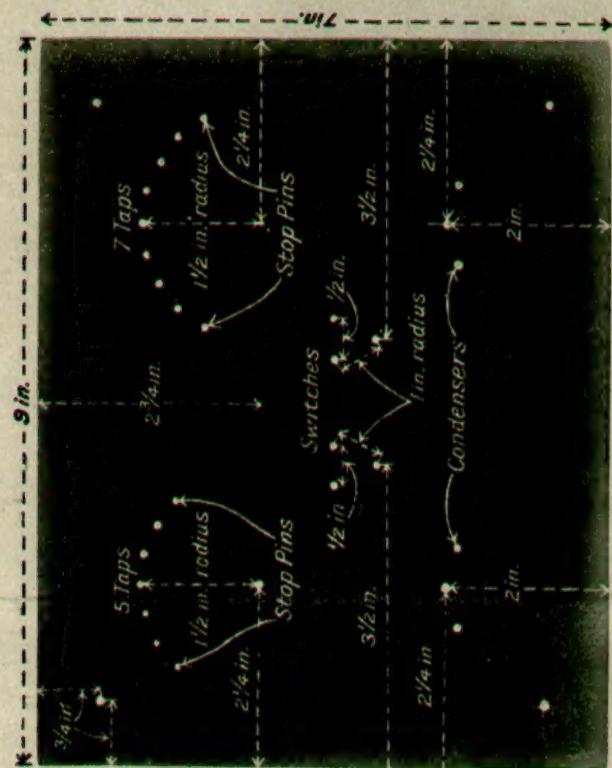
Dimensions and lay-out for the ebonite panel. Holes for tapping studs, switches, and condenser spindles should be drilled as shown
